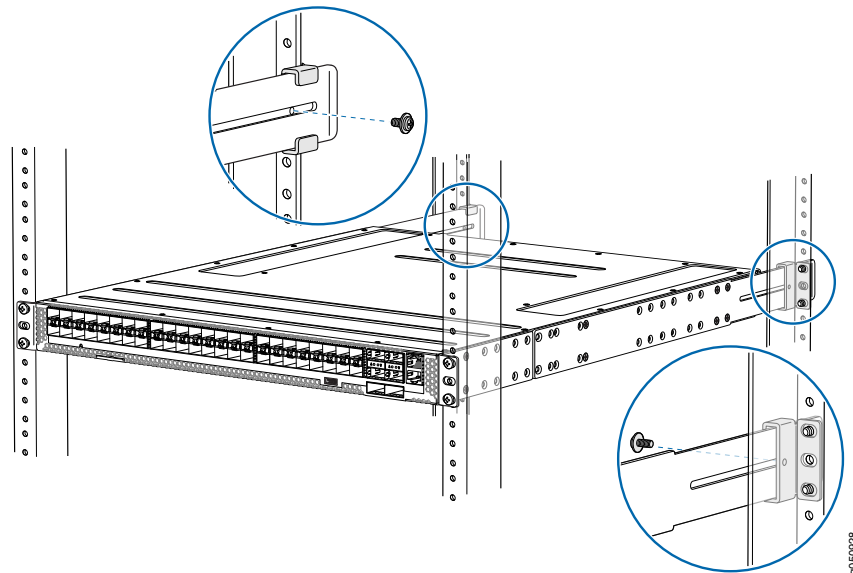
Slide Blades into Mounting Rails and Attach to the Rack
